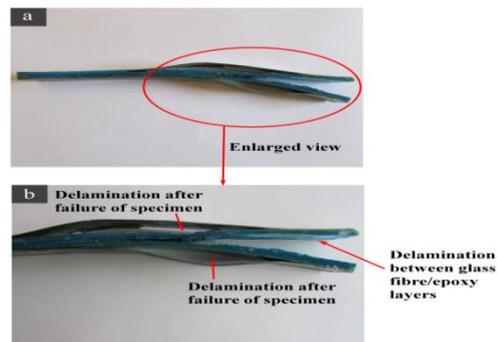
(a) Conditioned flexural specimen failure, (b) Conditioned flexural specimen failure (Enlarged view)
